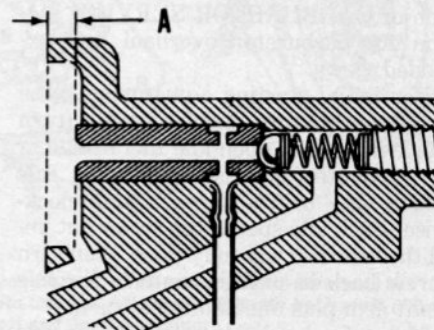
Plunger guide should be 0.125-0.155 inch (A) from end of guide to face of oil tank.
